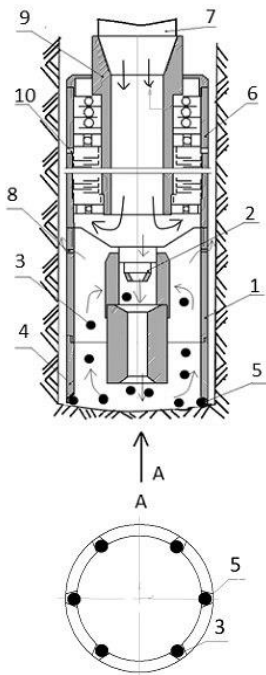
Pellet impact drill bit device with mechanical weapons of shot type:
